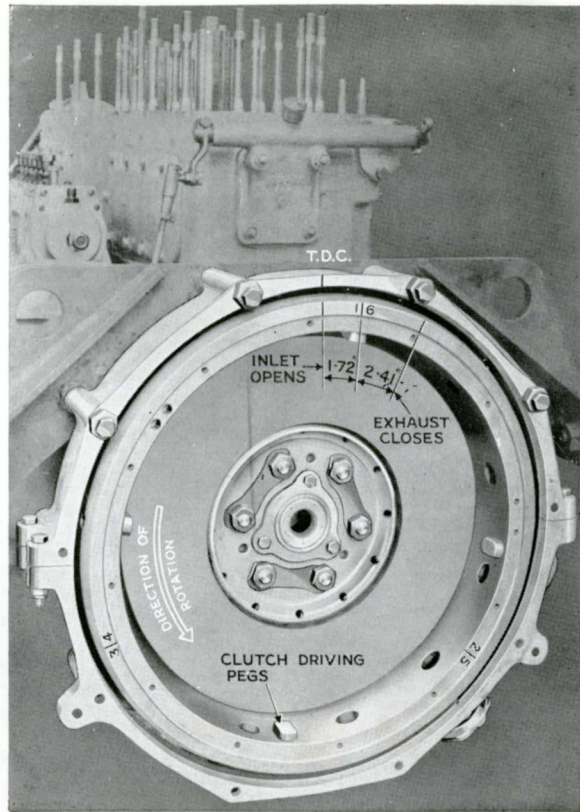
VALVE TIMING MARKS ON FLYWHEEL
